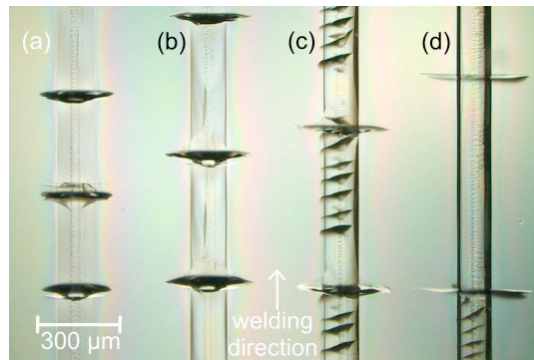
Top view on the welding seams in D263 glass. Cracks perpendicular to the welding direction are clearly visible. In (b)-(d) also tunnel-like cracks can be observed. The welding conditions are: (a): NA = 0.55, P = 4 W, v = 20 mm/s, f = 700 kHz; (b): NA = 0.55, P = 4 W, v = 20 mm/s, f = 1 MHz; (c): NA = 0.55, P = 4 W, v = 20 mm/s, f = 2 MHz; (d): NA = 0.55, P = 4 W, v = 20 mm/s, f = 3.9 MHz
